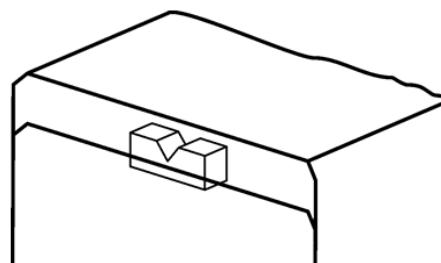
Location of the V-notch for fatigue crack growth test
